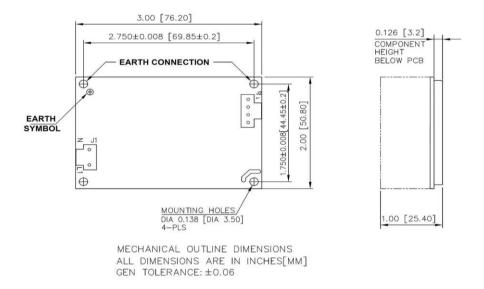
Mechanical Drawing - Molex Header (Option 2)
